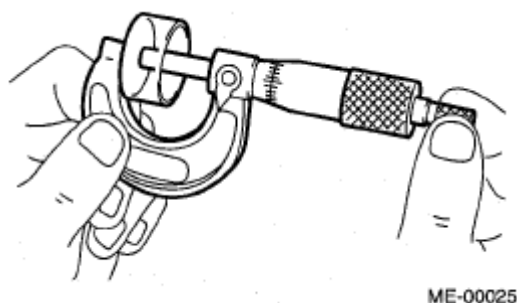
Measuring Thickness Of Valve Lifter Using Micrometer
